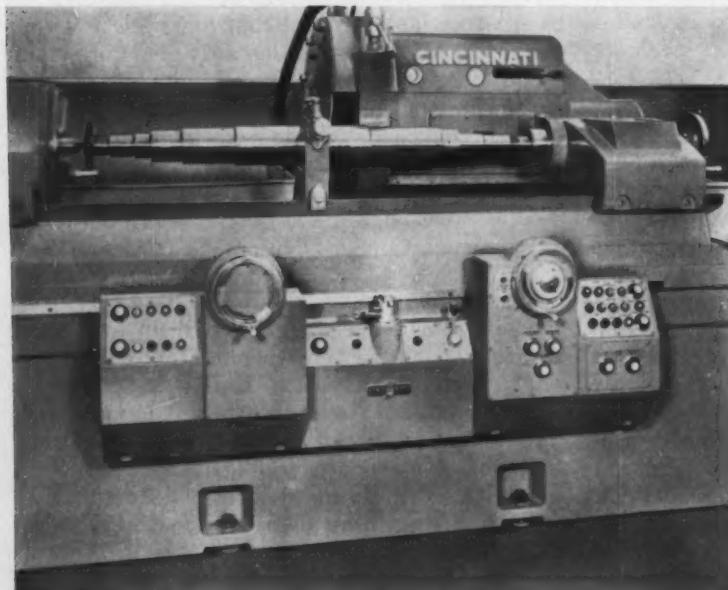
Cincinnati Milling first numerically controlled center type cylindrical grinding machine
